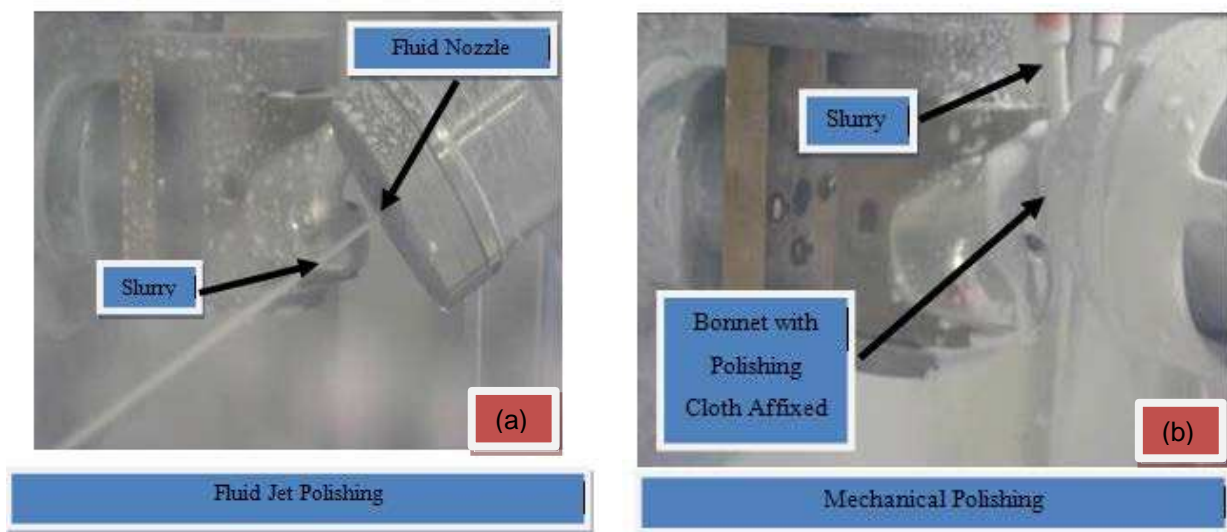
Mechanical and FluidJet Material removal Mechanisms
